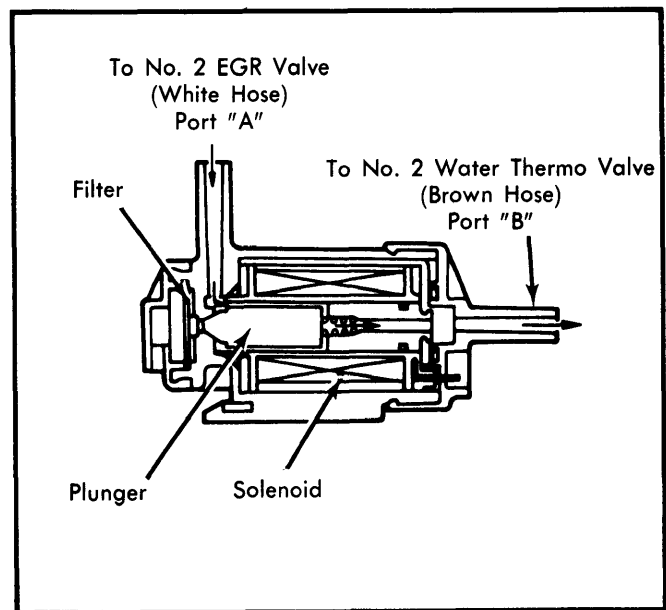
Exploded View of Calif. Auto. Trans. GLC No. 2 Three-Way Solenoid Valve
